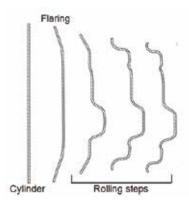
Scheme of the rim forming operations from a steel cylinder
